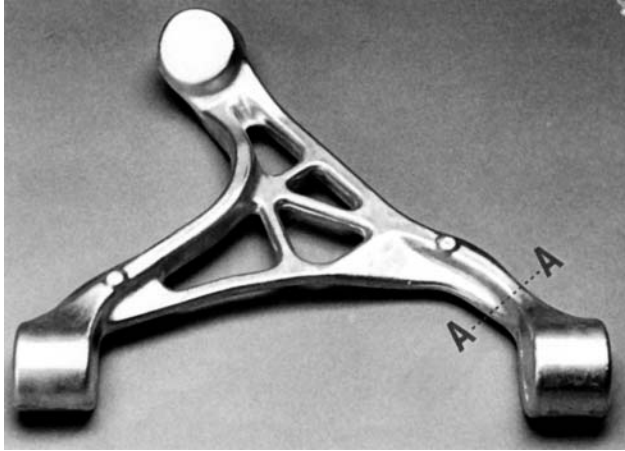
Automotive suspension part (A6000) forged by Kobe Steel Co.
